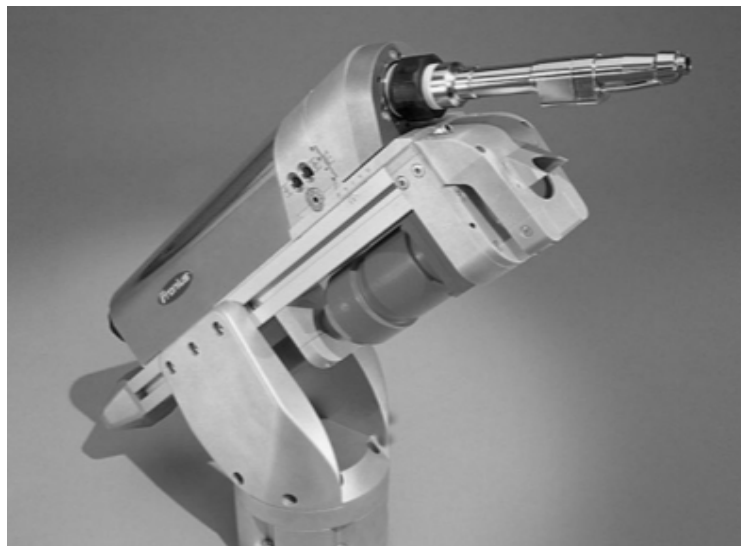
A LHW welding head developed by Fronius International [49]
